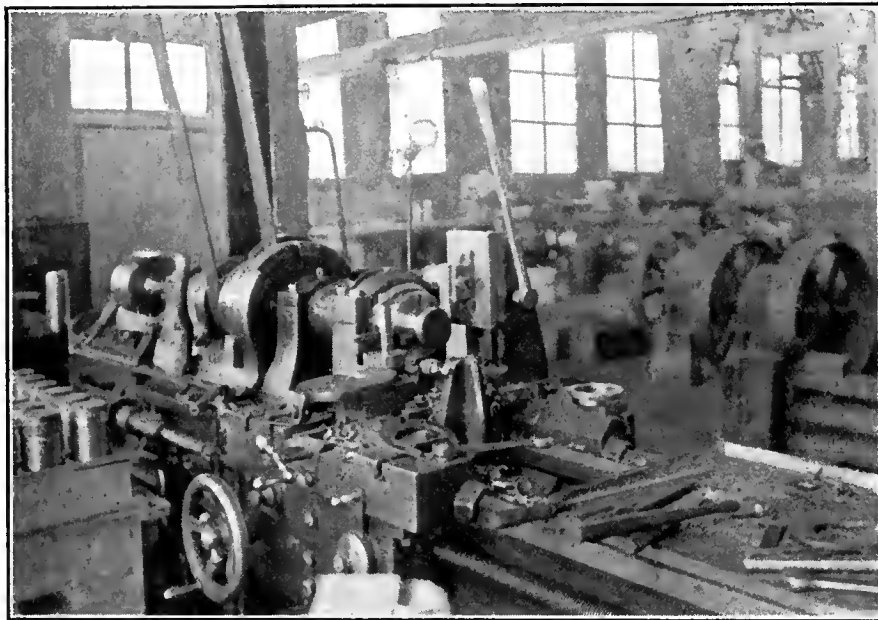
TURNING COPPER BANDS ON A LONDON MACHINE TOOL CO. ENGINE LATHE.
